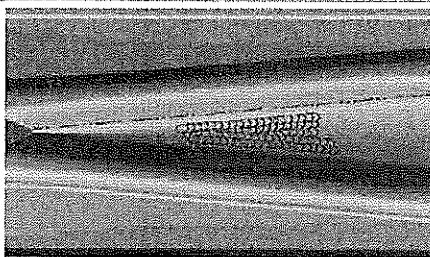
Build-up welding, worn area does not reach running edge
